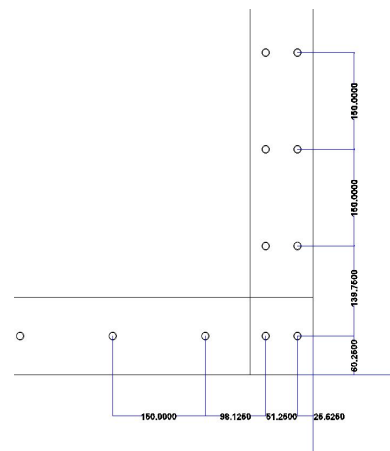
Right bottom corner of a galvanized steel sheet for dimension purposes
